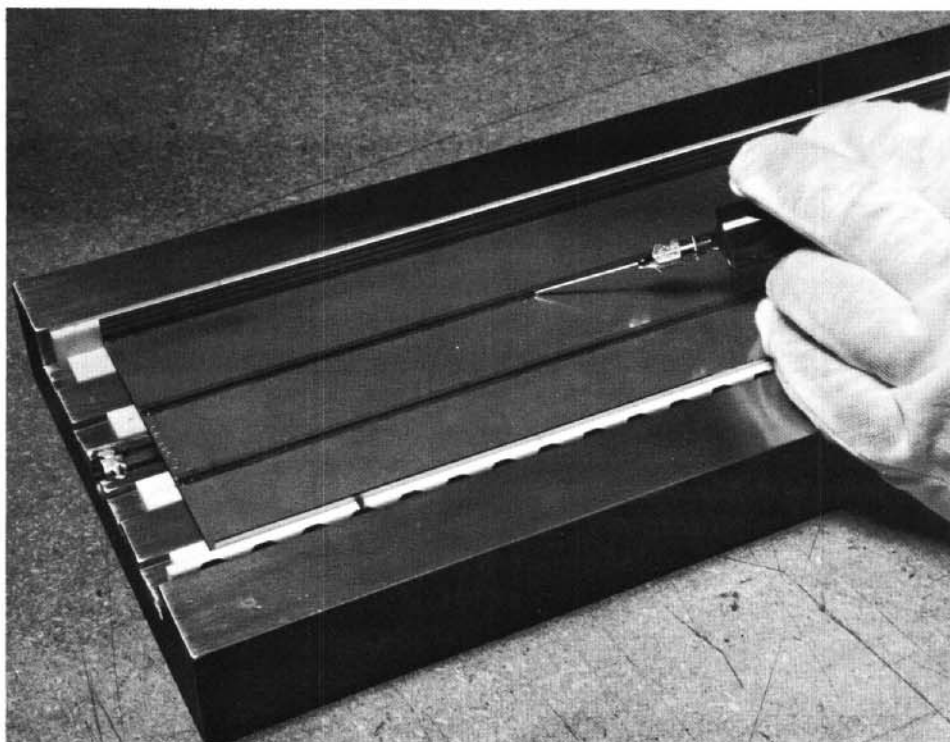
Application of Brazing Alloy at Spacer Wire-to-plate Joint
